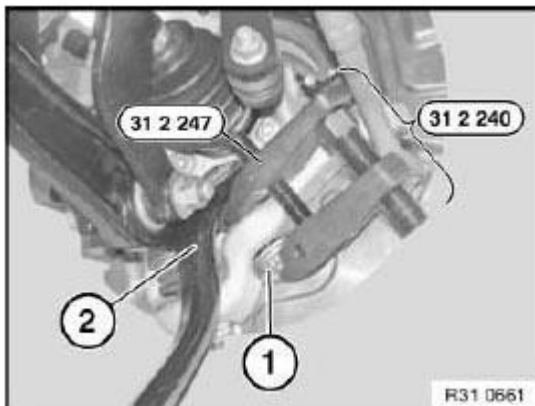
Identifying Tension Strut, Nut And Special Tool (31 2 247)
